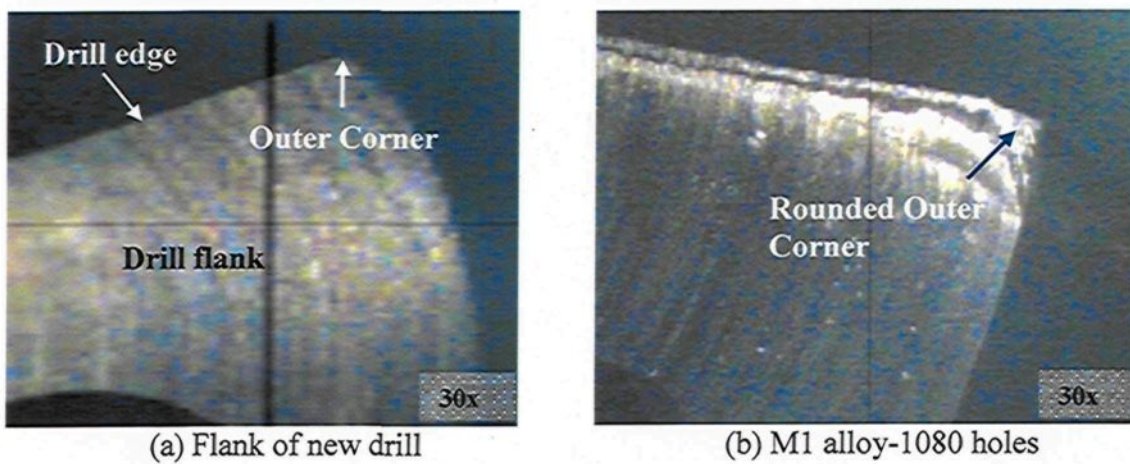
Photographs showing wear mode on cutting edge after drilling the M1 alloy.
